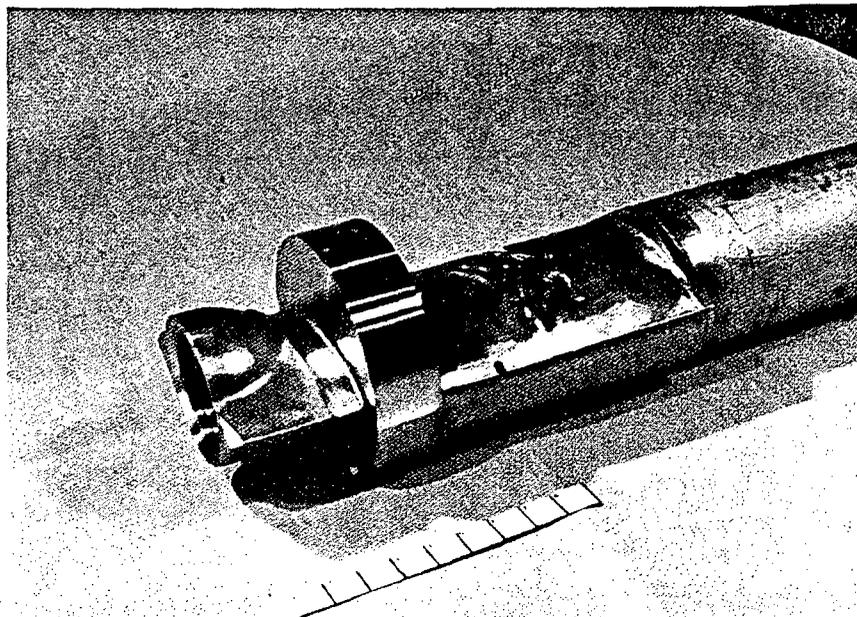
Front Face of Upper Guide Tube Showing Side Entry Orifice
